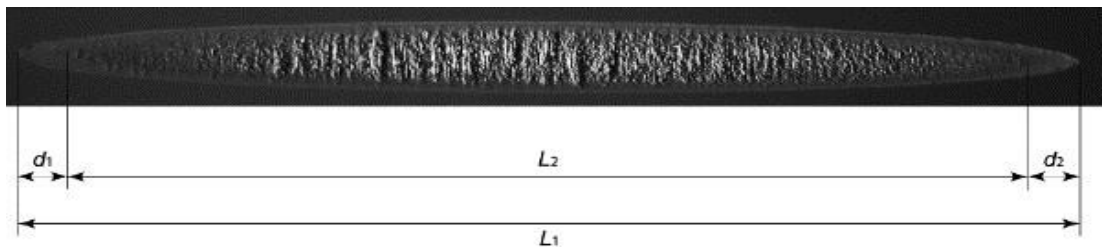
Scratch made on a silicon workpiece using fly cutting [80]
